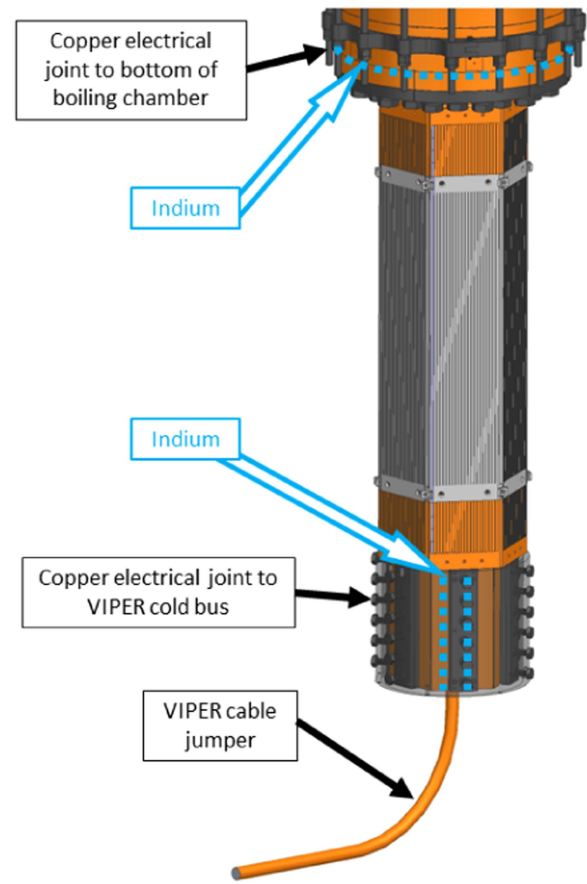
Solid model image showing a fully assembled REBCO section with the thick stainless steel clamping tube around the VIPER cable shown as transparent.
